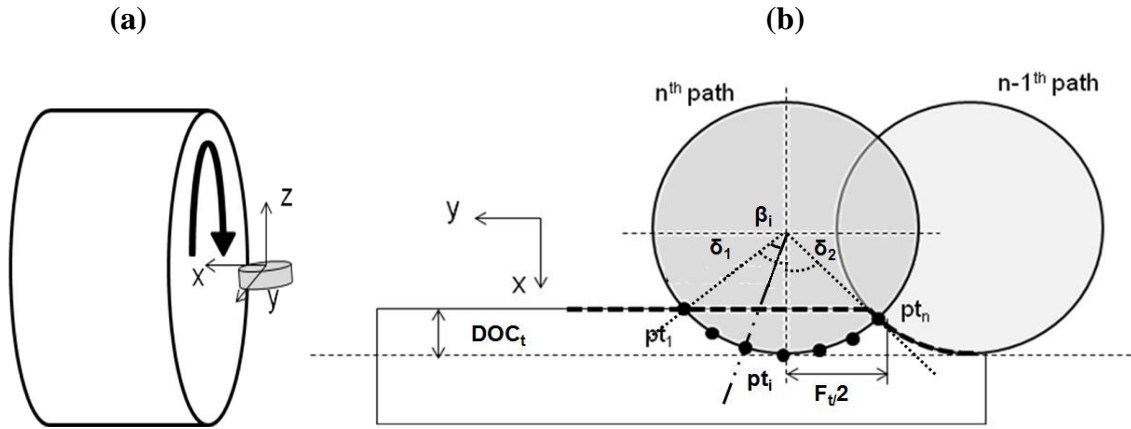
(a) Face turning using round insert (b) Illustration of the engagement region and points on the cutting edge
